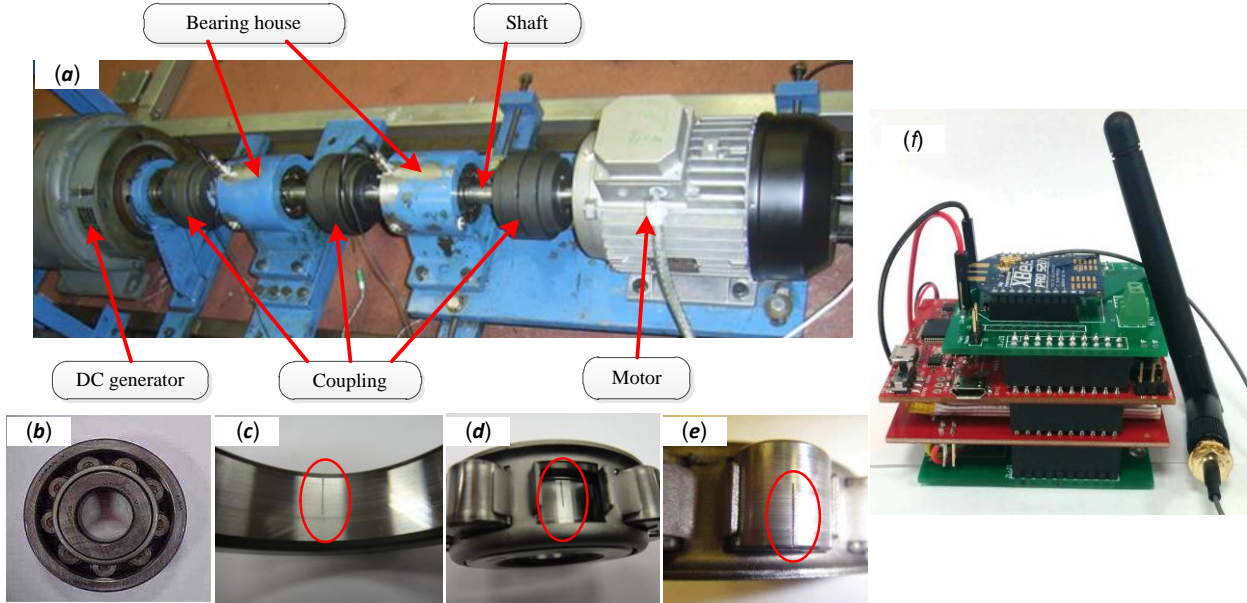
Bearing test rig and bearings for experiments: (a) bearing test rig, (b) healthy bearing, (c) bearing with outer race defect, (d) bearing with inner race defect, (e) bearing with roller defect and (f) wireless sensor node
